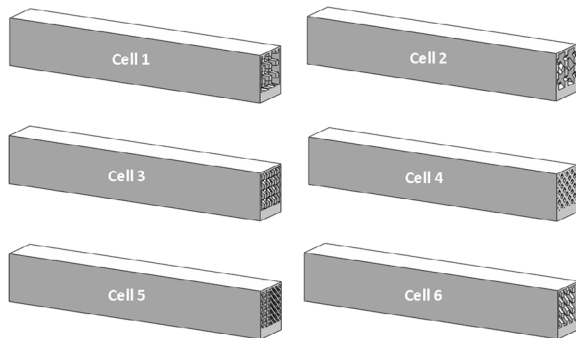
Final geometries to be manufactured (best optimum of each cell type)
